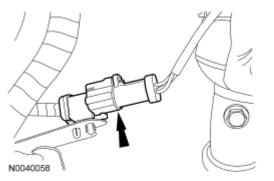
Locating CMS Electrical Connector Courtesy of FORD MOTOR CO.
